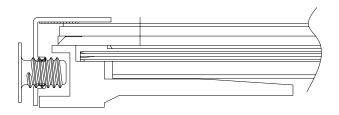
[ DETAIL DESCRIPTION OF SIDE MOUNTING SCREW ]
